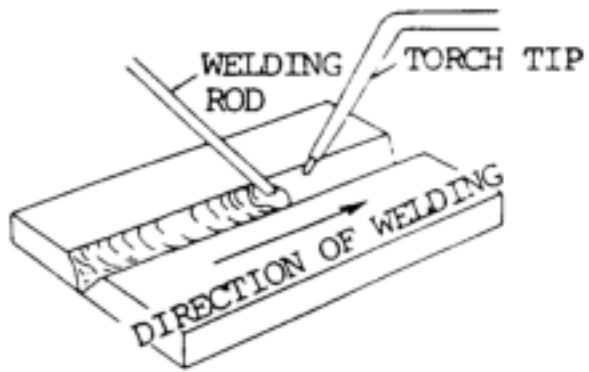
Travel angle--fillet and groove weld.
